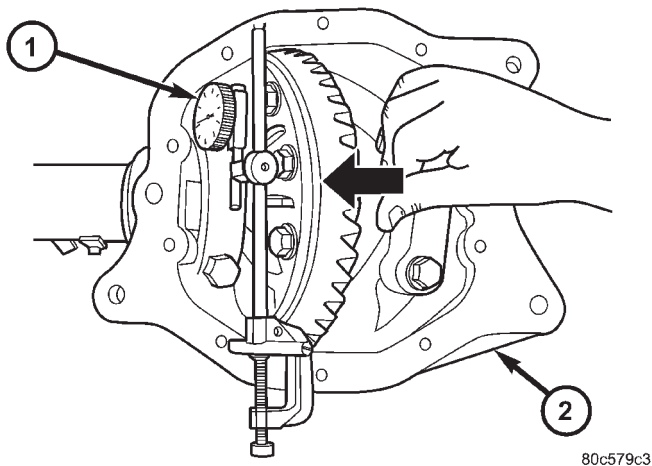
DIFFERENTIAL RING GEAR SIDE
